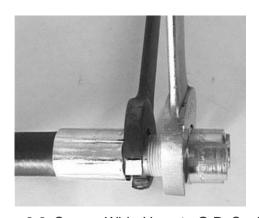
Secure Whip Hose to Q.D. Socket.
